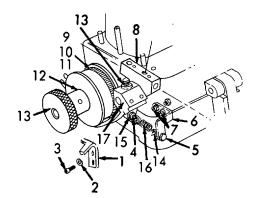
Belt Finger Holder Cushion Spring Holder, Installation.
